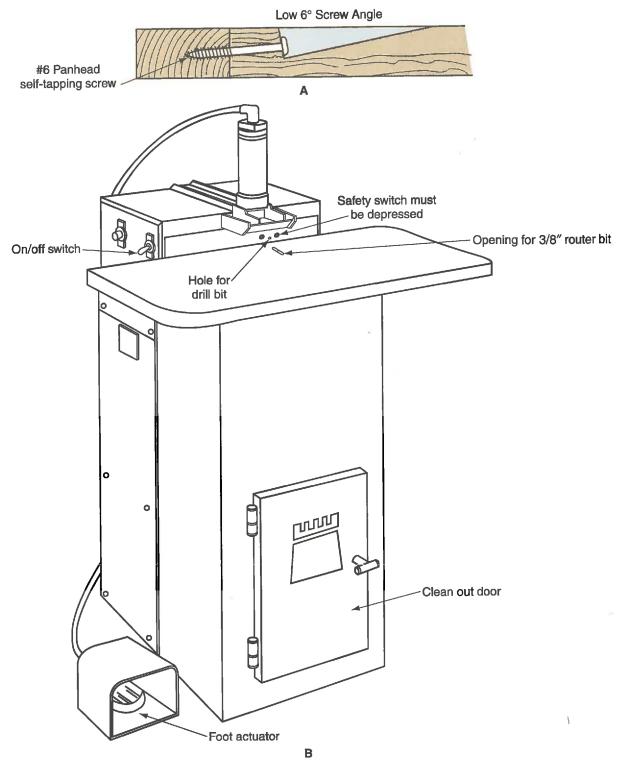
A—The pocket is routed and the pilot hole is then drilled. B—Stationary pocket machine. (Castle, Inc.)
